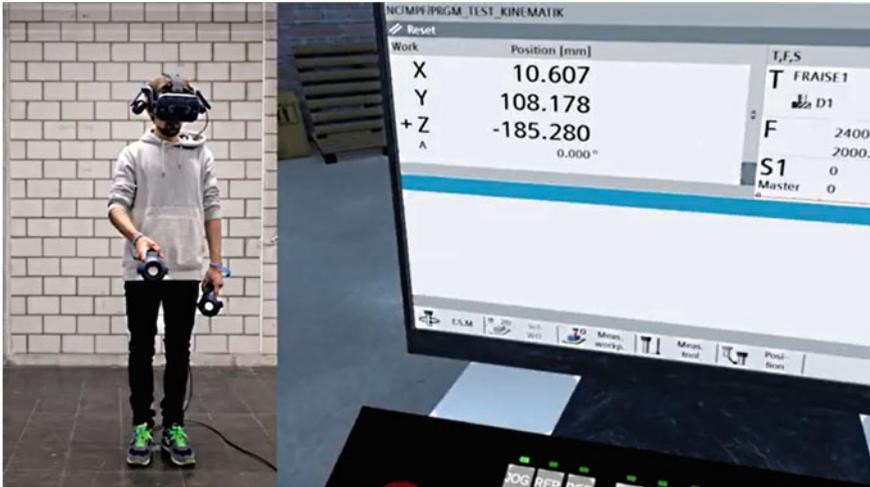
A machine operator accessing the machine's DT through VR (left) and a VR view of the virtualized Human-Machine Interface (HMI) (right)
